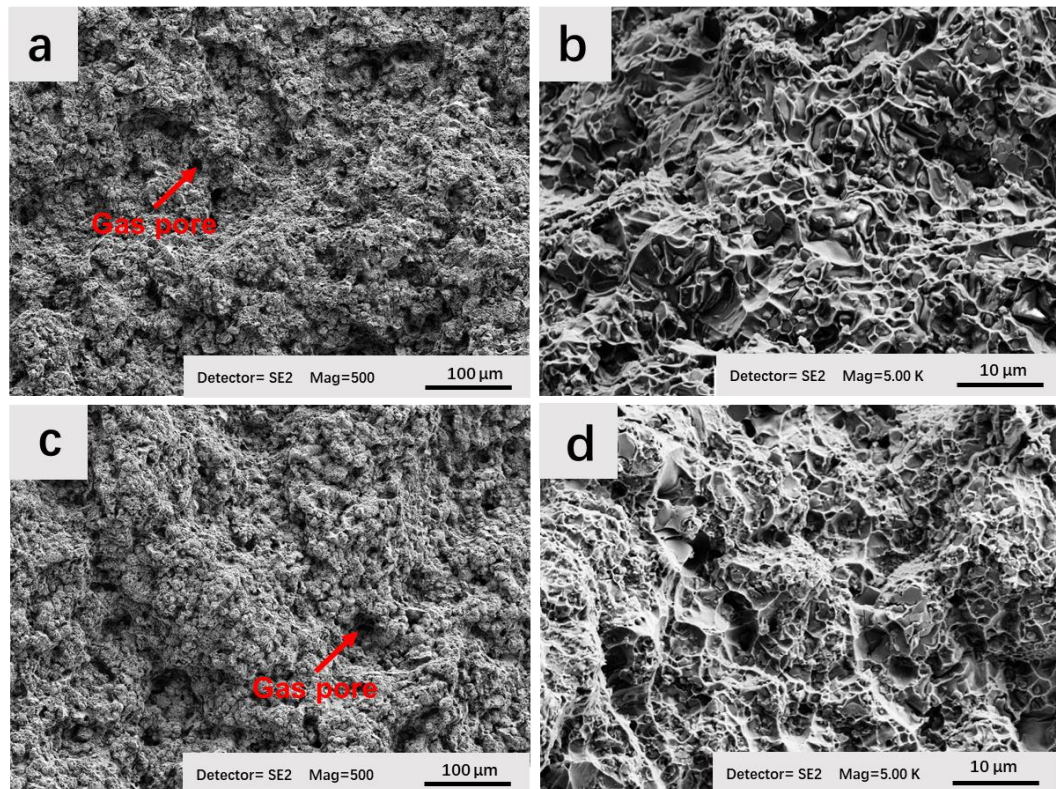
The fracture surface of alloy B (a,b) and alloy C (c,d)
